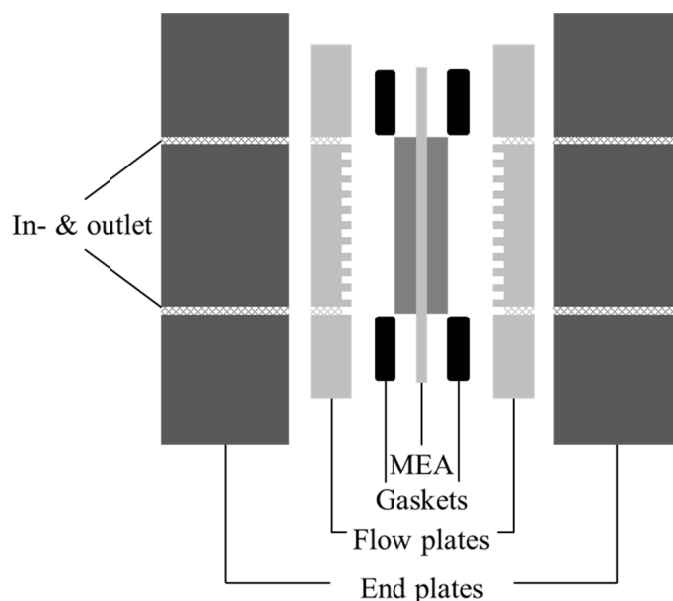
Schematic exploded view of electrolysis cell cross section.
